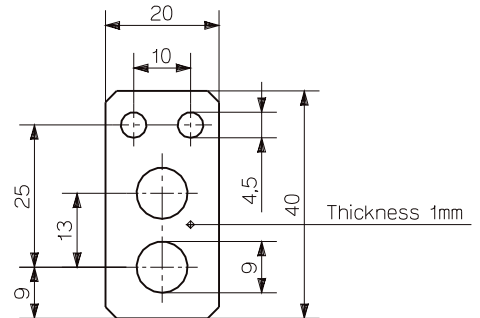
Mounting plate (Art. No. 3.520.1015)
